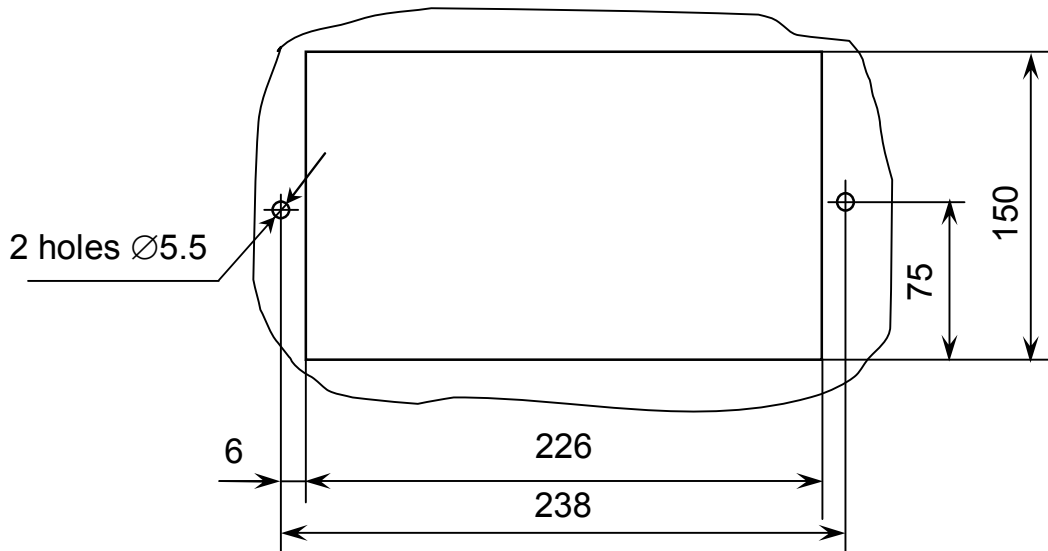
Layout of attachment holes for a panel-mounted converting unit
